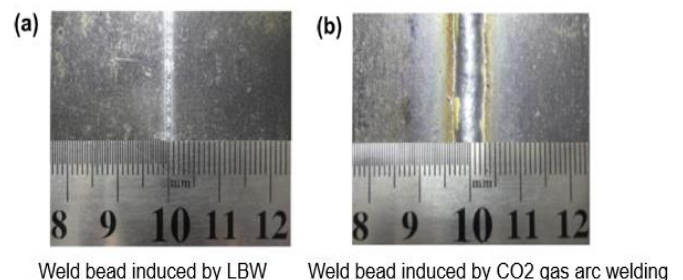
(a) Top view of LBW joint (b) Top view of CO₂ gas arc welding joint [6]
